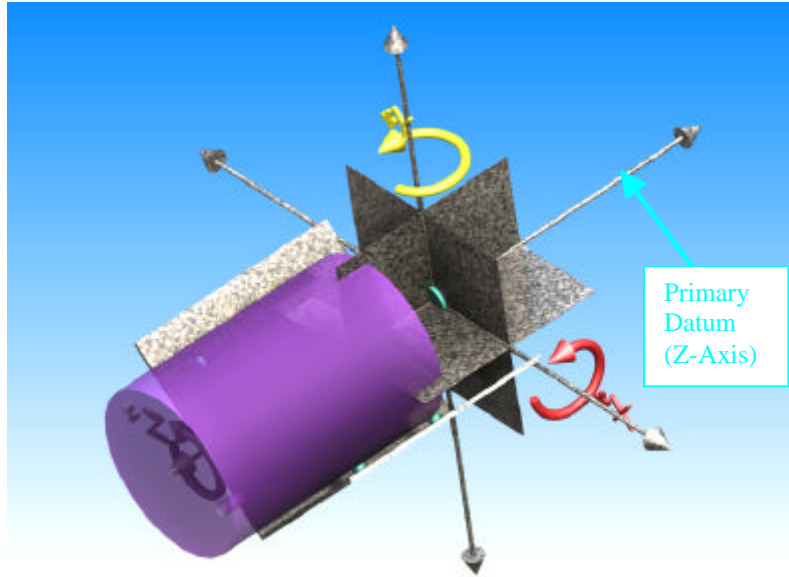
Illustration of coordinate system showing part with contact on primary datum.
